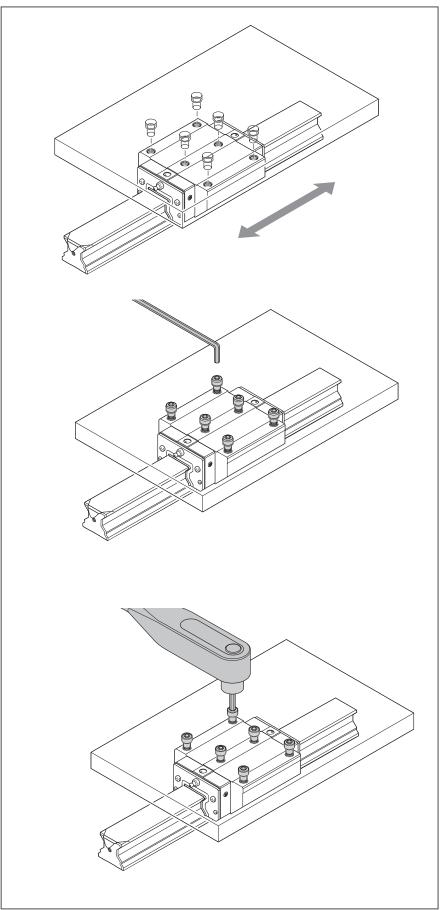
Fastening attachments to runner blocks (Scenario 1)
